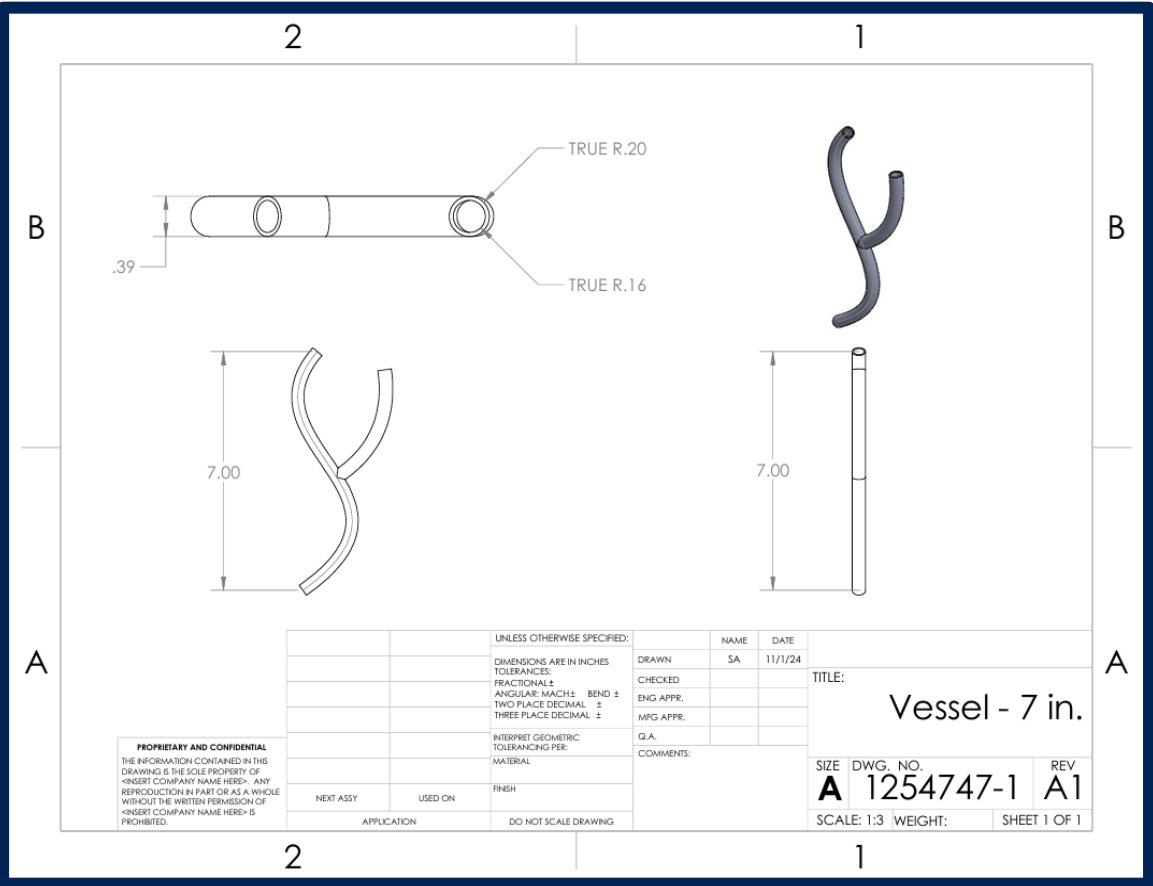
Drawing of Component [PN: 1254747-1 \_7 in. Vessel]
